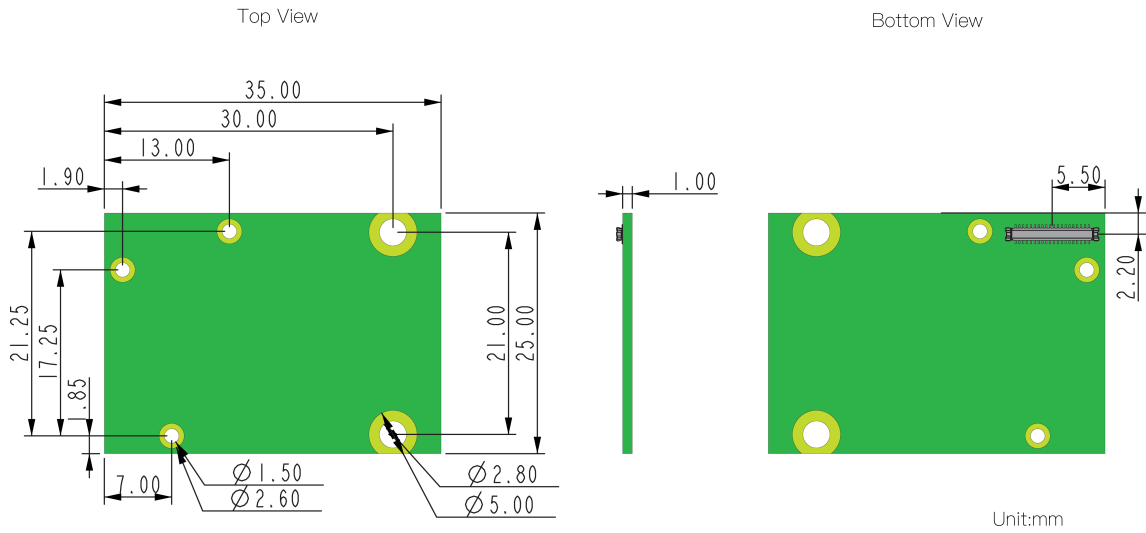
RAK12009 WisBlock MQ3 Alcohol Sensor Module Mechanic Drawing
